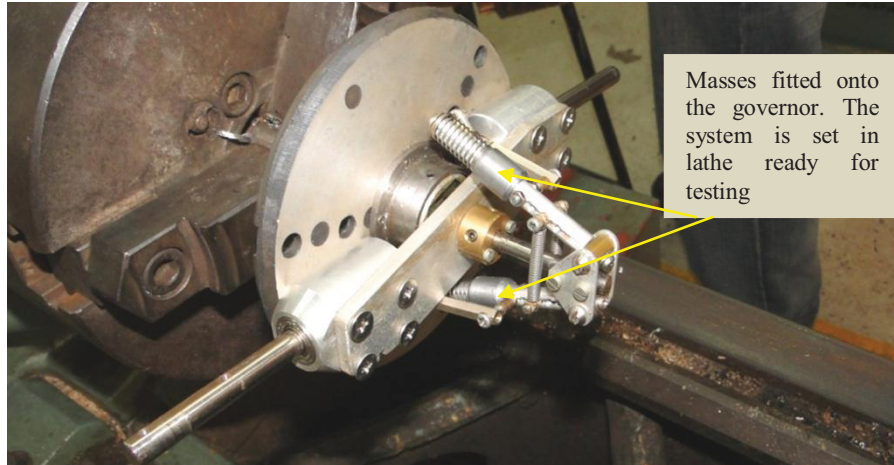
Pitch control mechanism setup for testing in lathe machine with variable speed control
